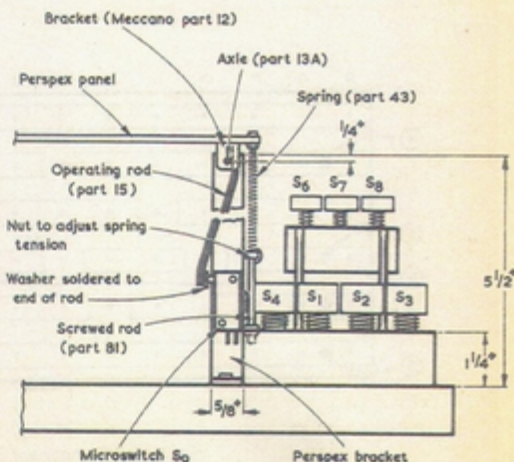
The load-sensing assembly. When a load is placed on the Perspex panel this moves down slightly, against the tension spring, and operates the microswitch
